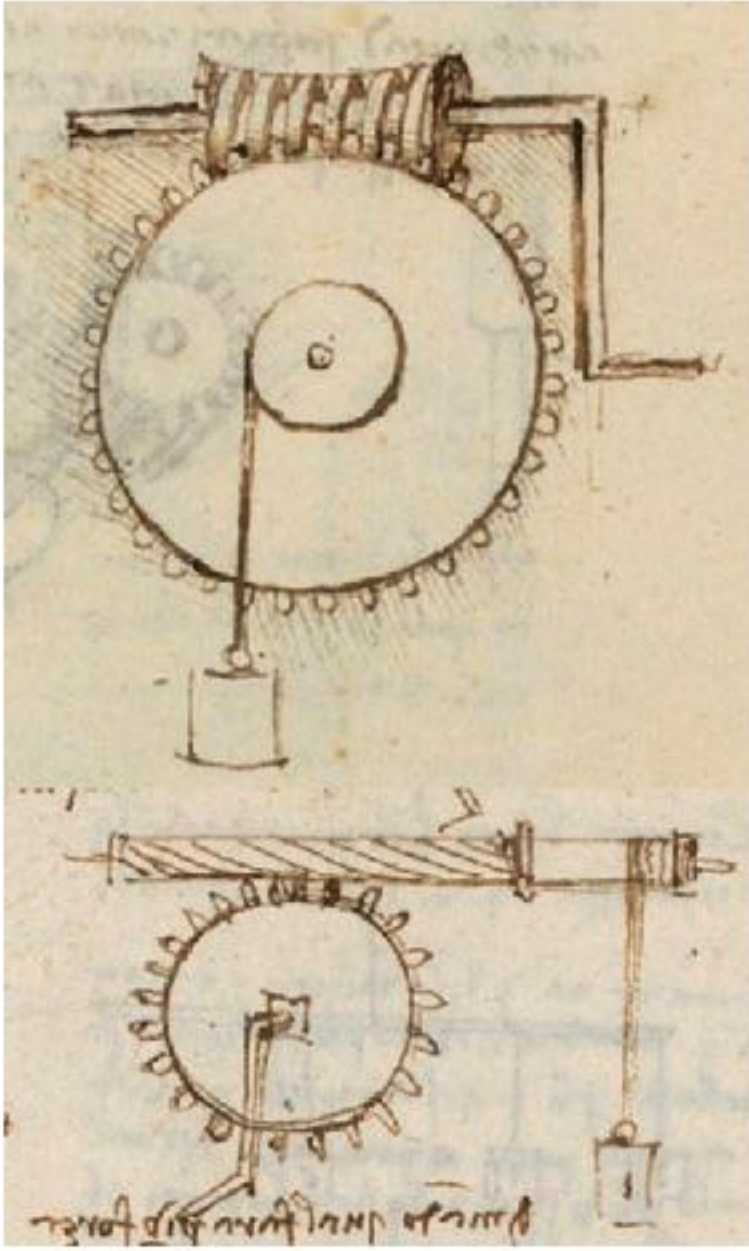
Two worm drives, also usable for converting rotary to linear motion
